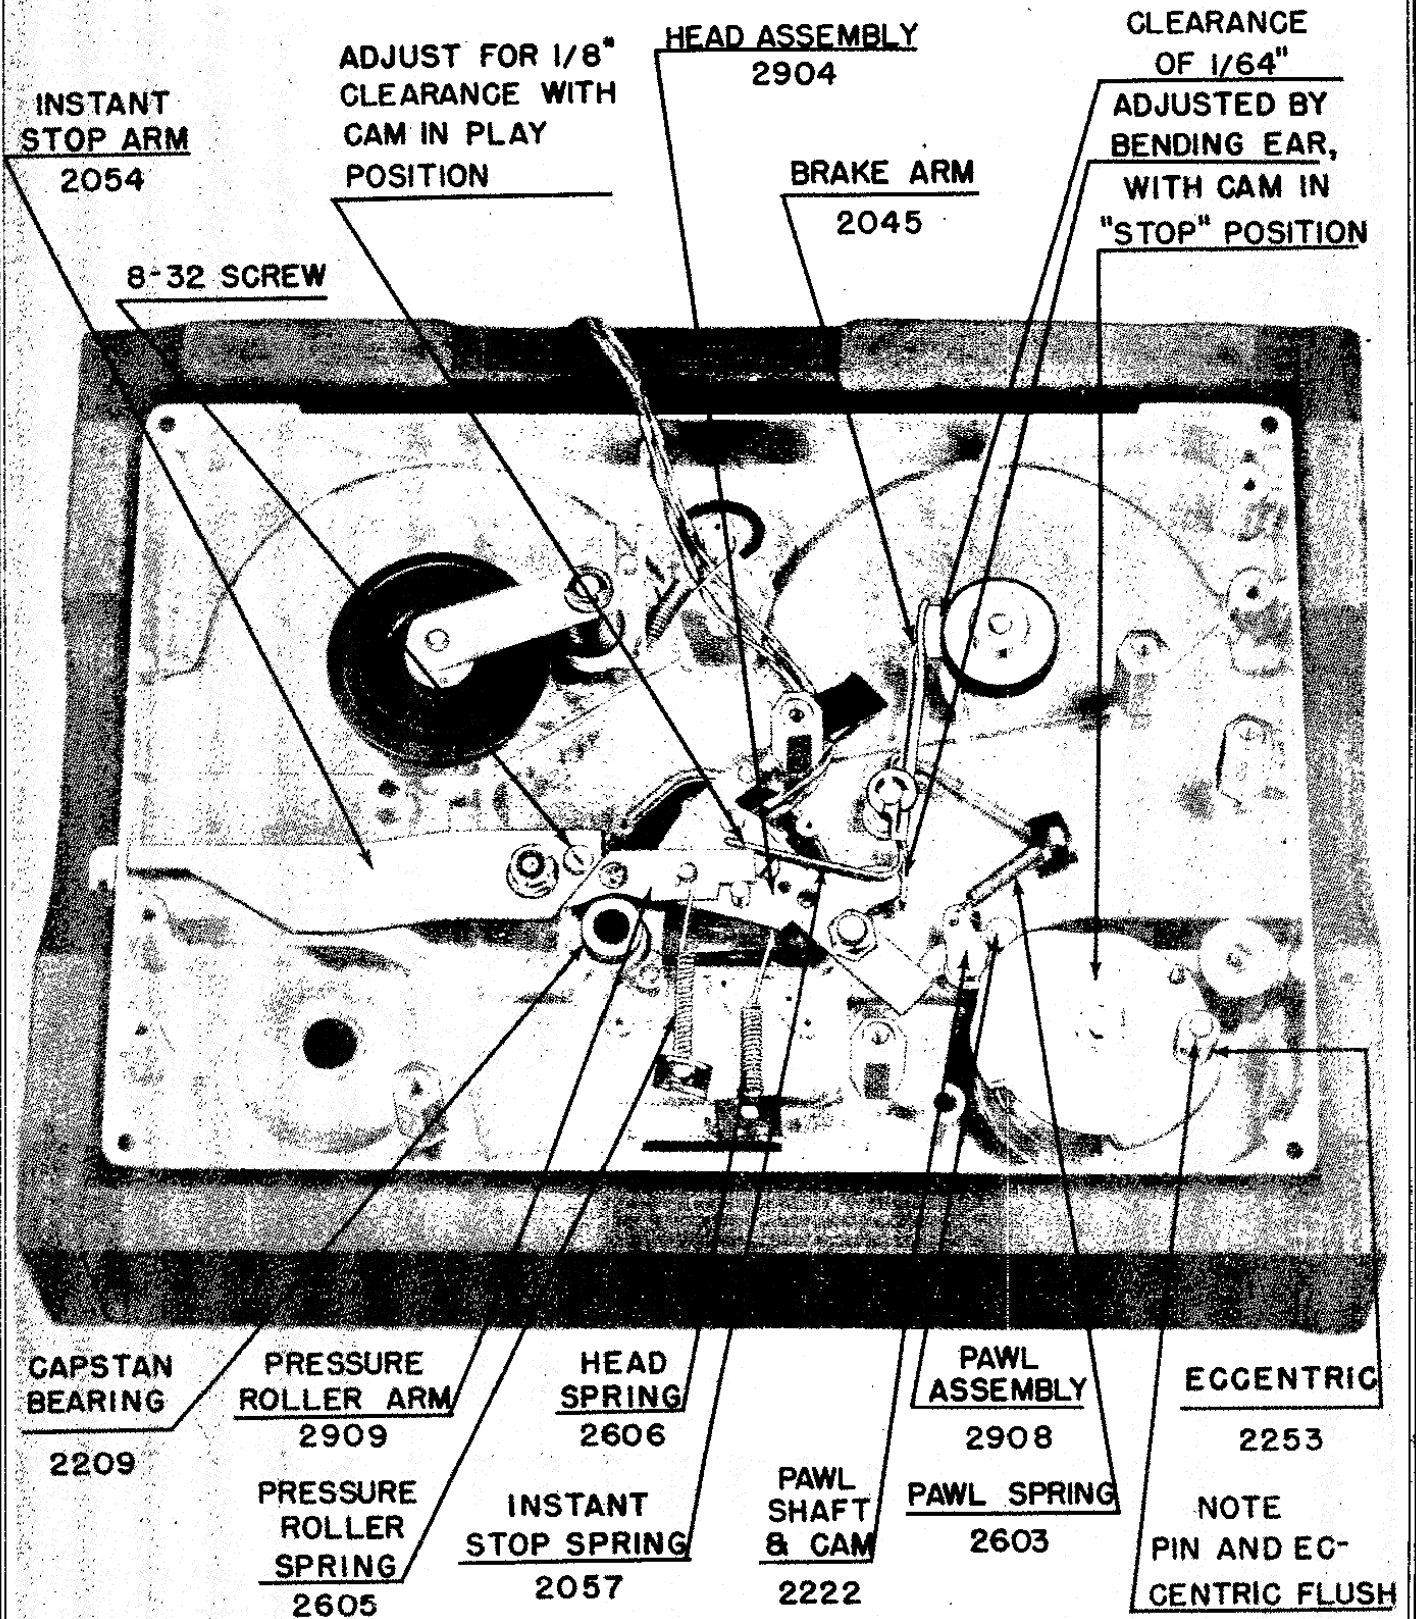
Bottom View of Recorder After Removing Flywheel Assembly.
